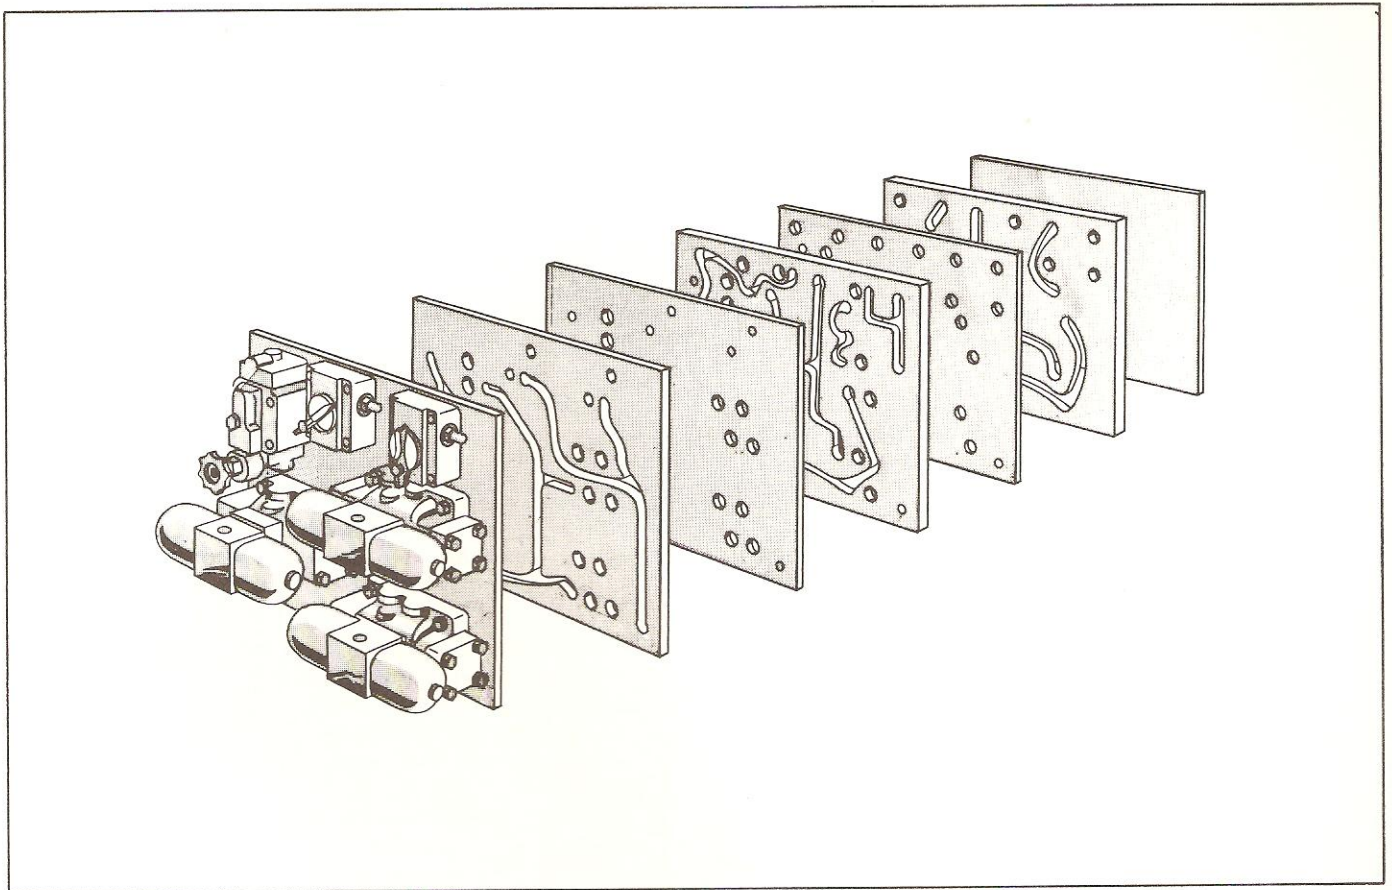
Manifold Contains Interconnecting Passages to Eliminate Piping Between Valves
